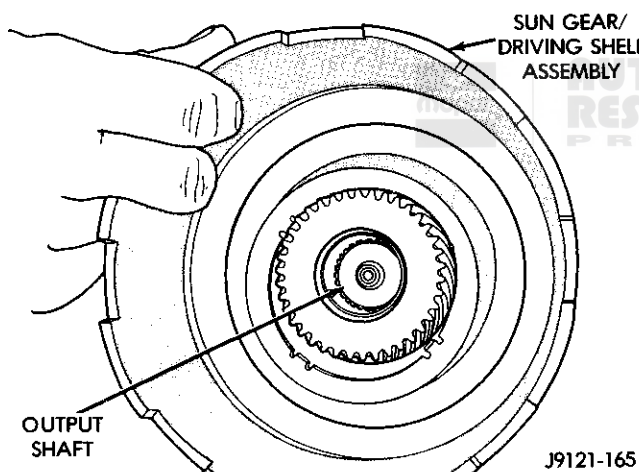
Installing Assembled Sun Gear And Driving Shell On Output Shaft
